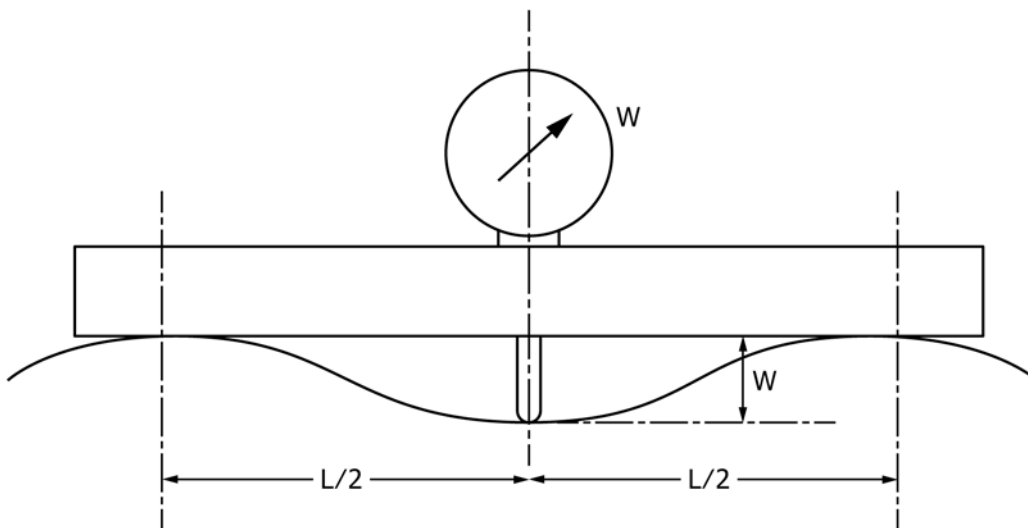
"Flat Bottom" Roll Wave Gauge with Dial Indicator
